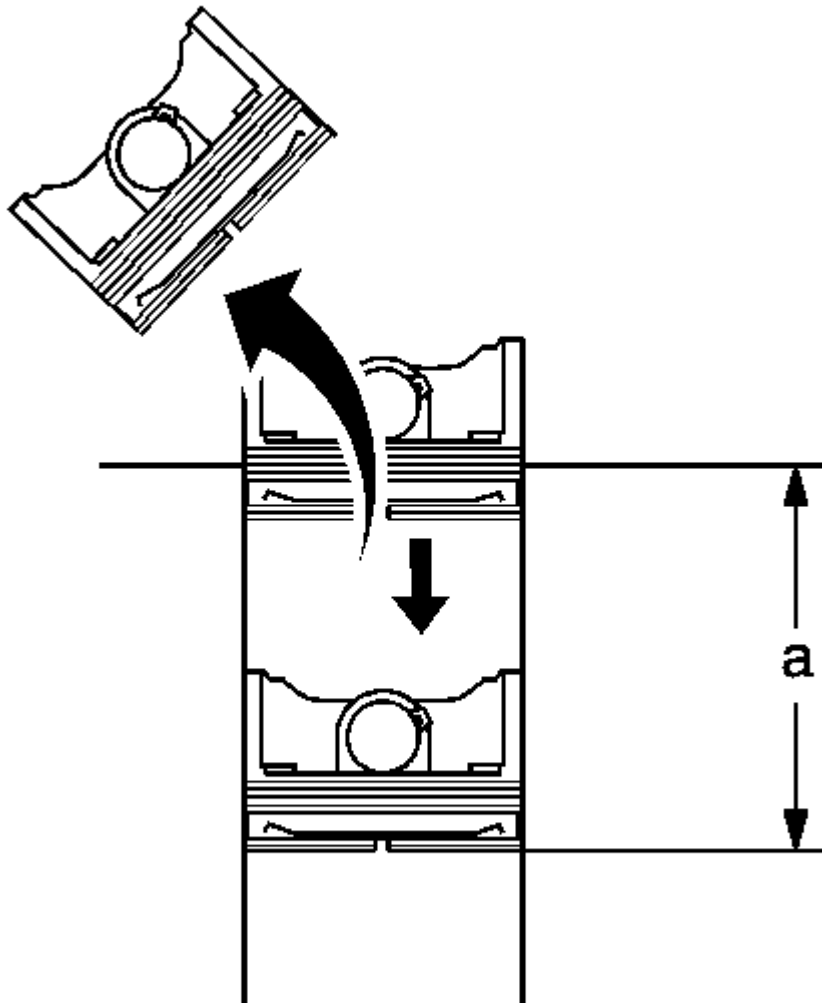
View Of Pushing Piston Ring Beyond Bottom Of Normal ring travel
